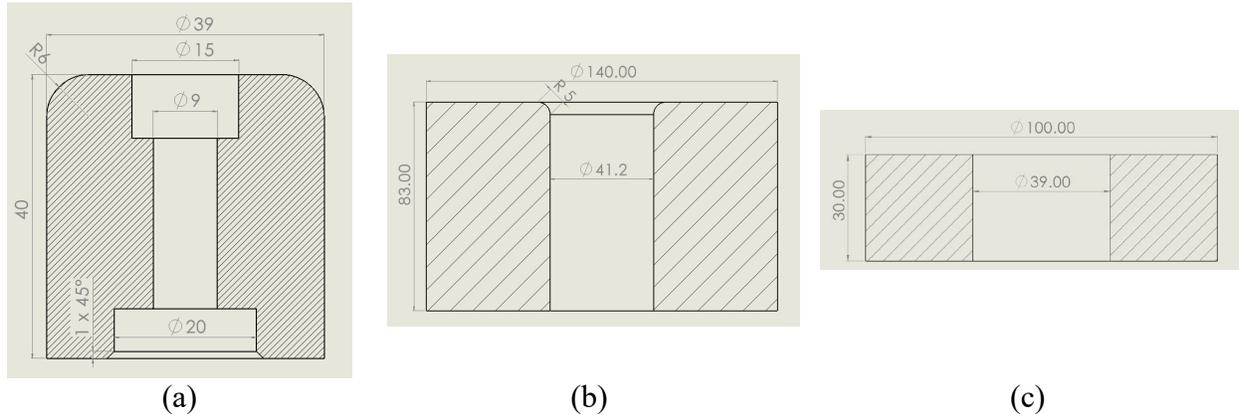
Geometry of punch (a), forming die (b) and blank holder (c)
